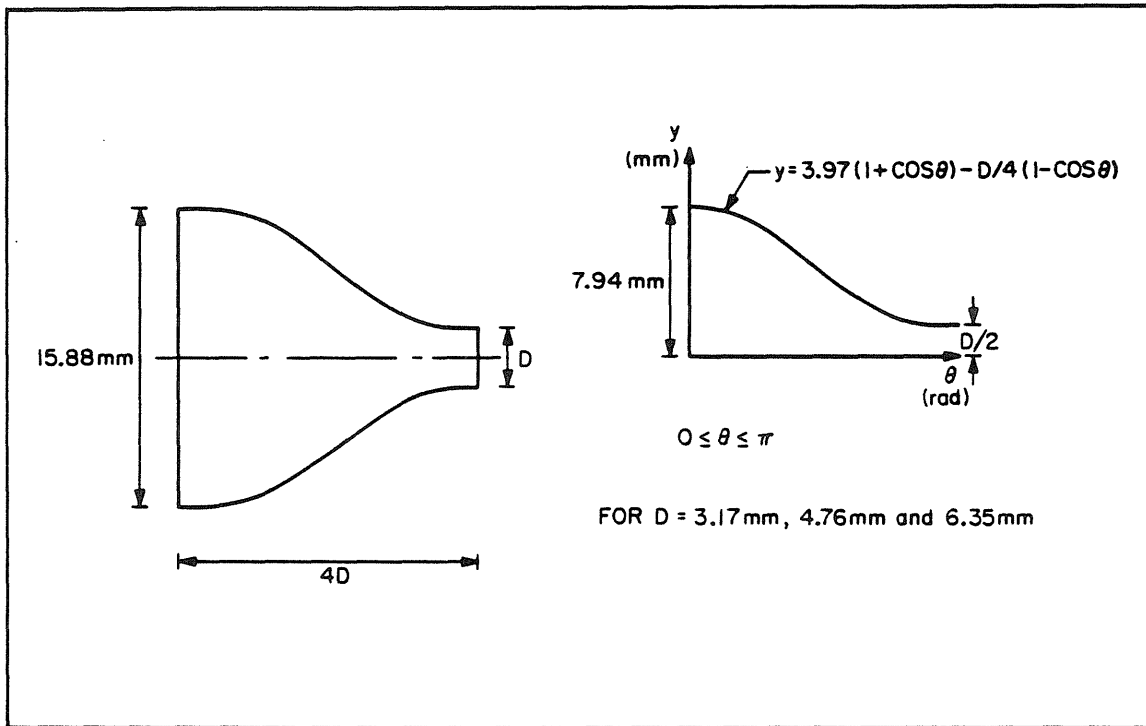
Diagram illustrating the geometrical shape of the nozzle.
